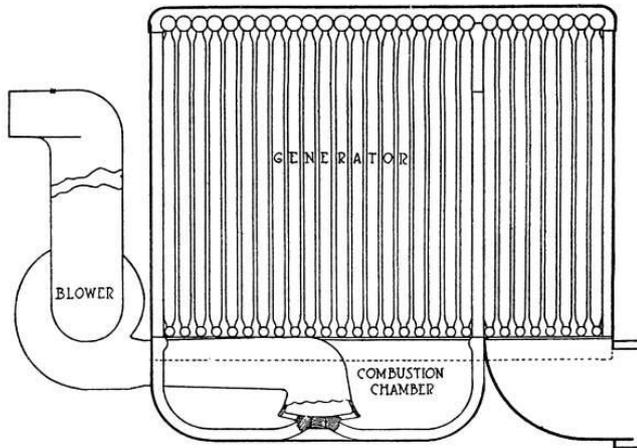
NEW TYPE OF STEAM GENERATOR
